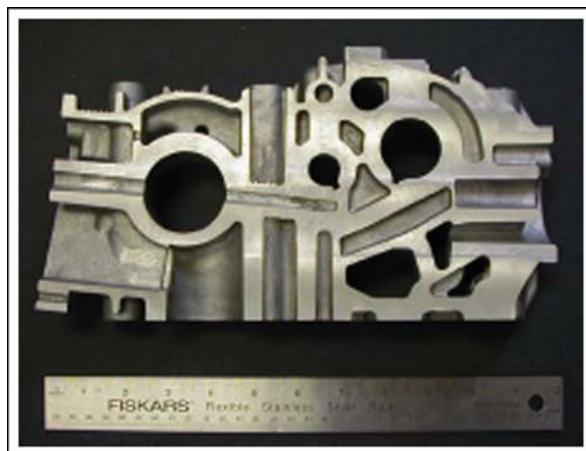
Section views of the oil pump filter housing produced by SSR (Courtesy Idra Prince)
